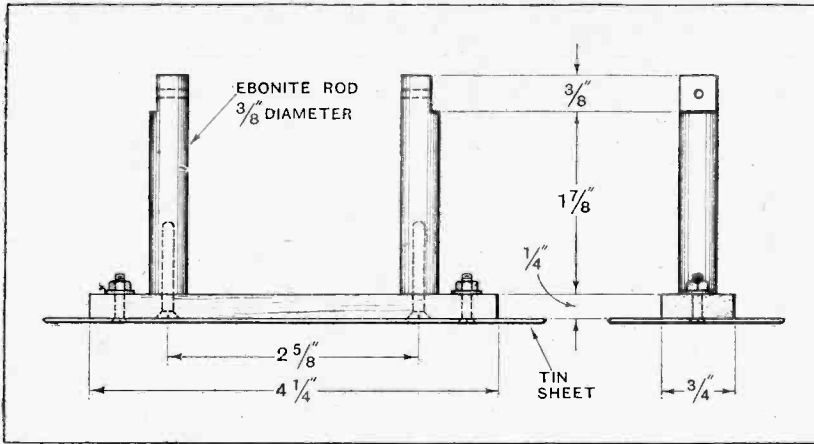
Construction of the base of the H.F. transformer. The two upright pieces are of ebonite, and the base is of wood. This is screwed, as shown, to the sheet tin. This drawing should be examined in conjunction with Figs. 2 and 3.
